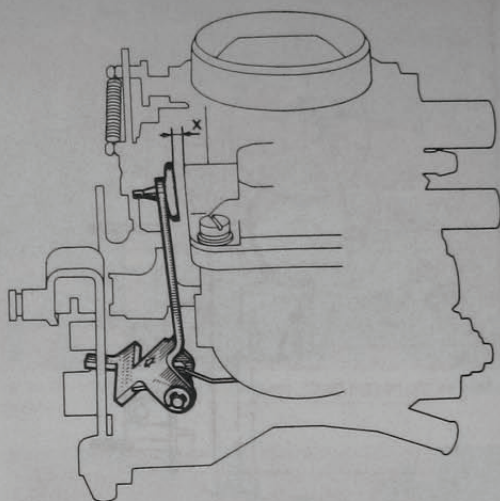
Defuming valve adjustment - Solex carburettor (Sec 17)
